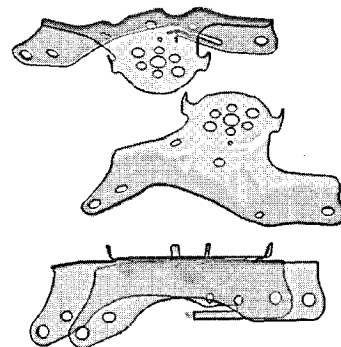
(b) Conformity of the finally stamped product for blank design D5 to the basic design of the center hinge at the final stage
